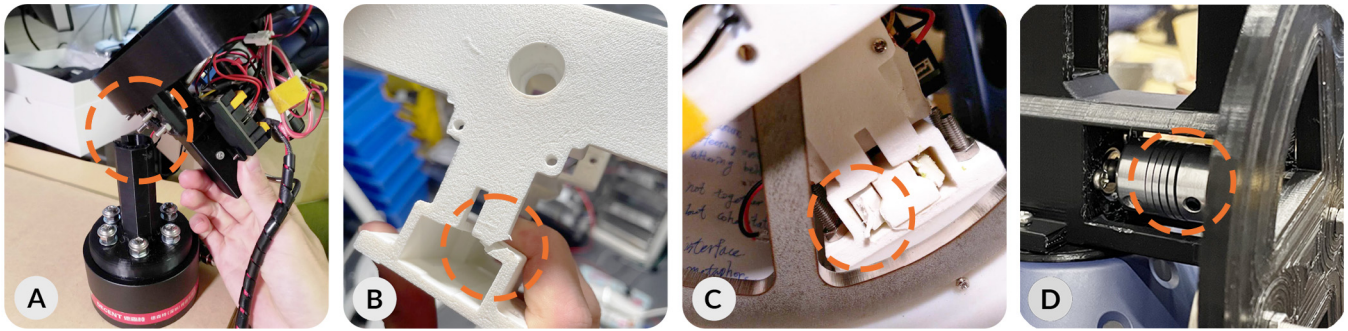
Examples of failed prototypes: (A) broken 3D-printed handle due to the torque and shock of the flywheels; (B) cracked 3D-printed housing around the solenoid stopper; (C) worn rubber dampener for the stopper. (D) irreversibly deformed aluminum flexible coupling, which eventually fractured after several uses due to increasing deformation.
